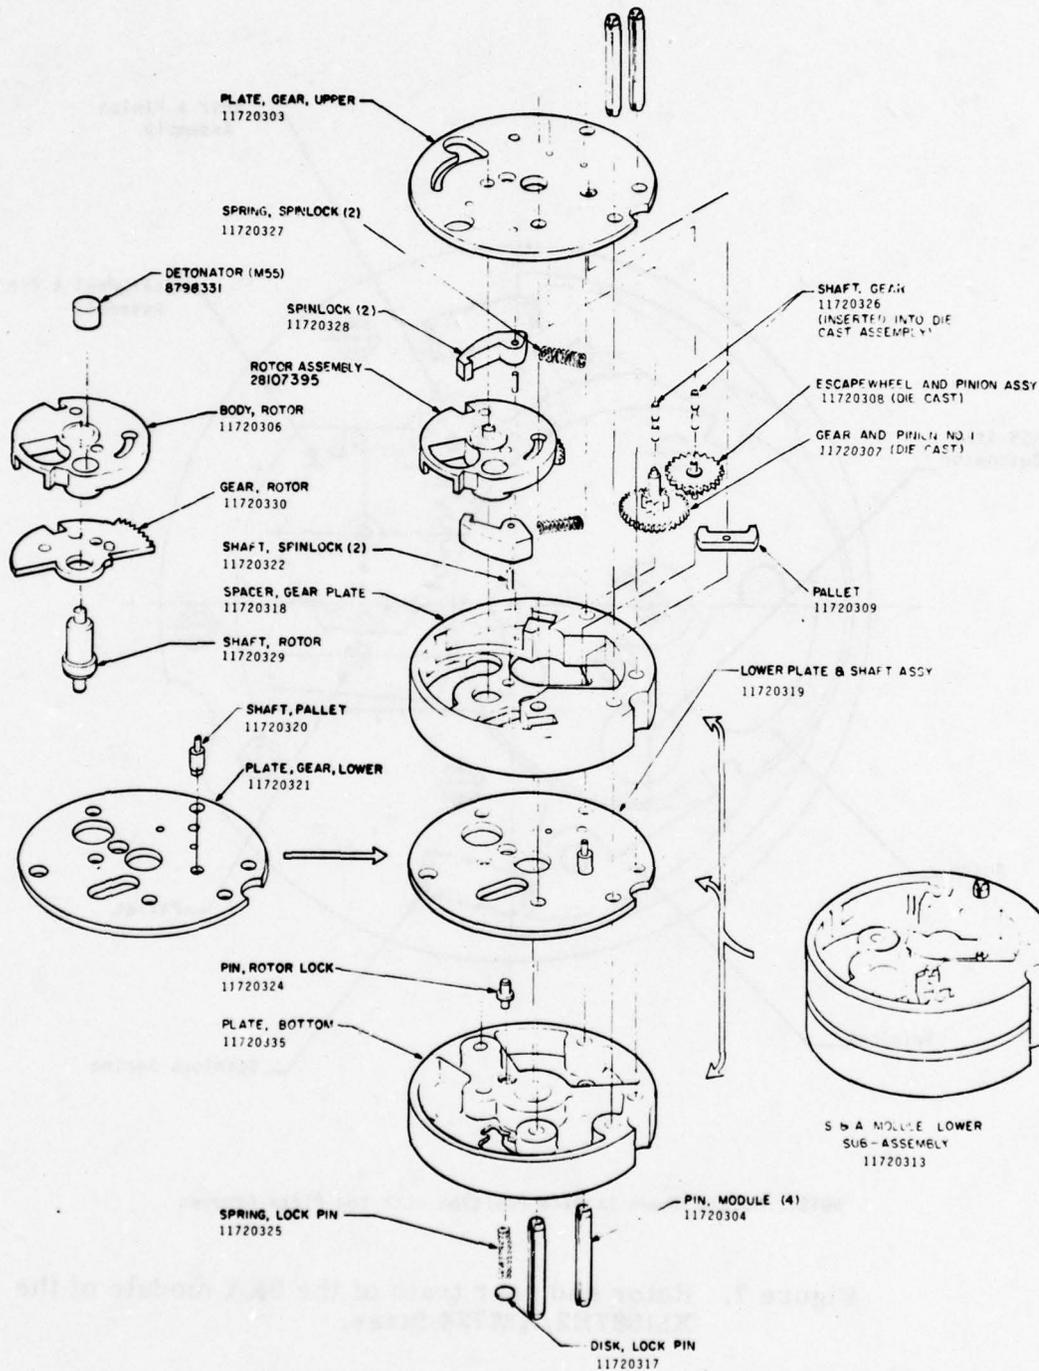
Exploded view of the XM587E2/XM724 fuze S&A module.
